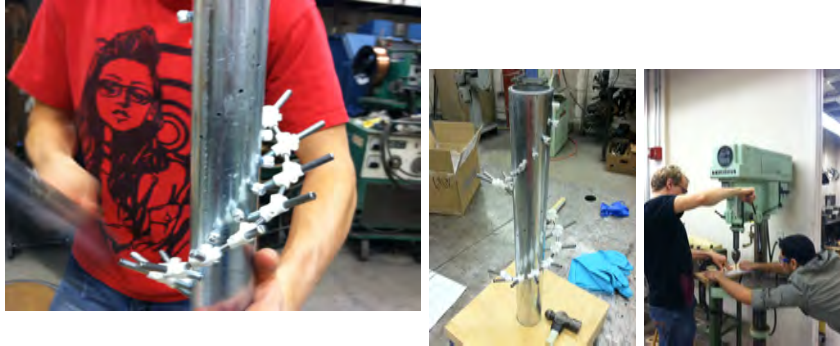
Joints were hammered to a tight fit. Each ring of joints was assembled as a unit. The final fabrication step was the cutting and drilling of the plexiglass steps of the staircase.
